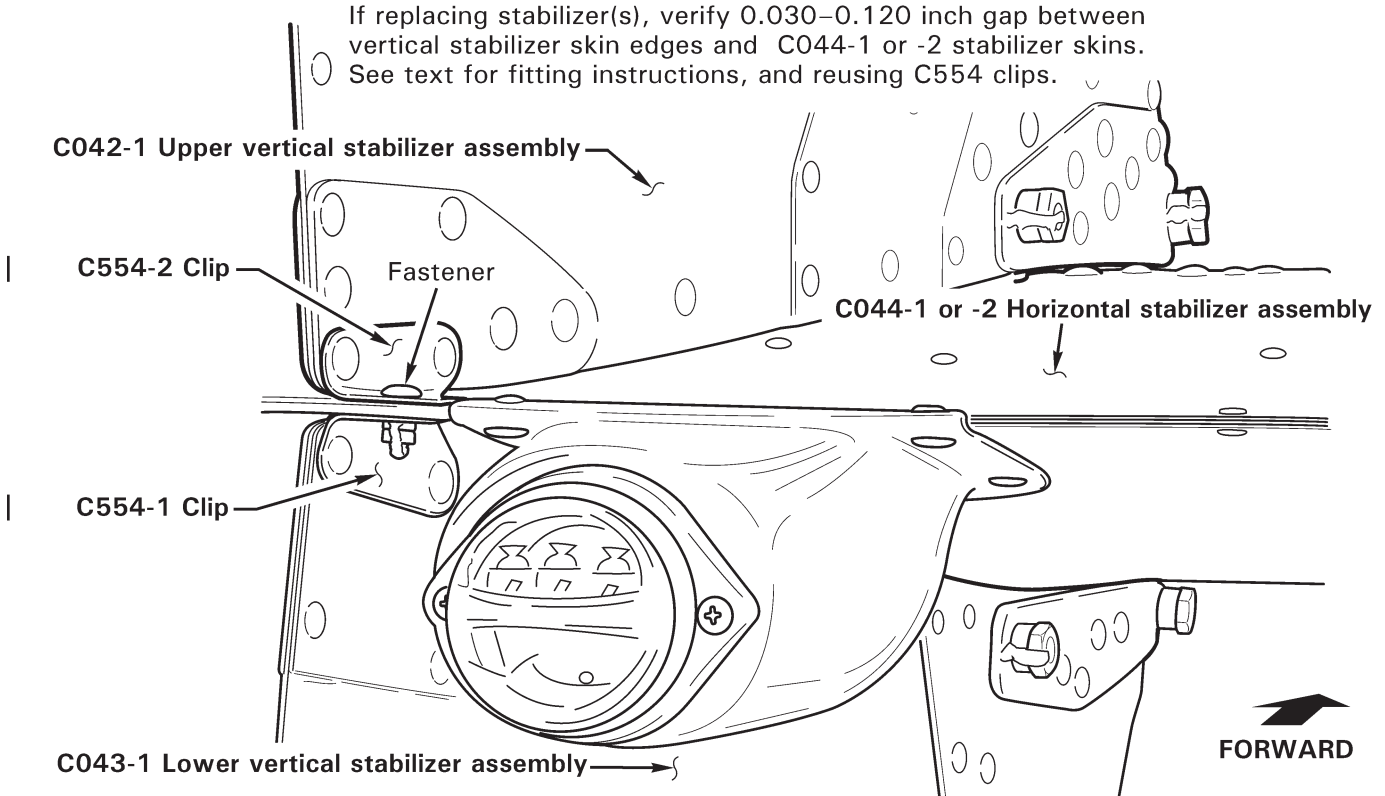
A C004-2 OR C004-3 EMPENNAGE ASSEMBLY – TAILCONE ASSEMBLY AFT BULKHEAD
